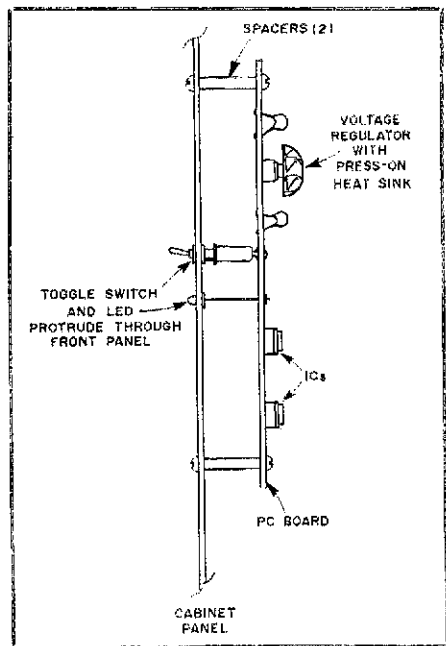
A sketch shows a method of mounting the interface board to the front panel of the cabinet. Note the use of a press-on heat sink with the voltage regulator IC.
